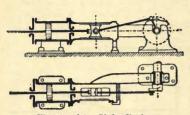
and 5.—Horizontal Engine with Bed-Plate.
